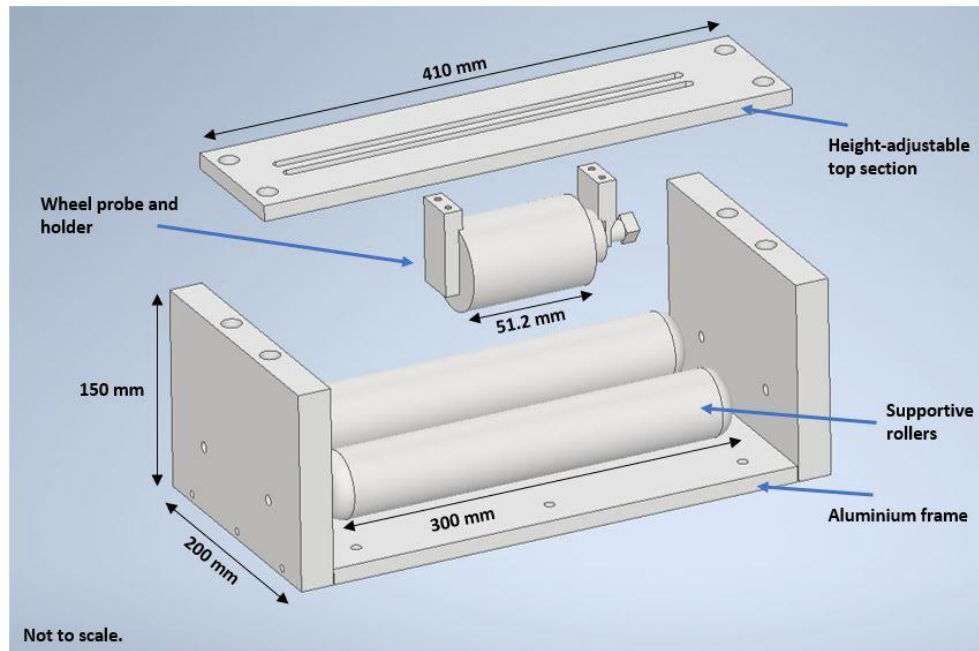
AutoCAD assembly of an ultrasonic inspection system design.
